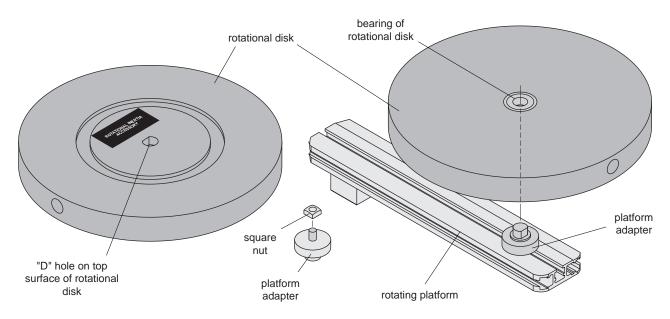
Rotational Inertia Accessory Including Platform Adapter Assembly
